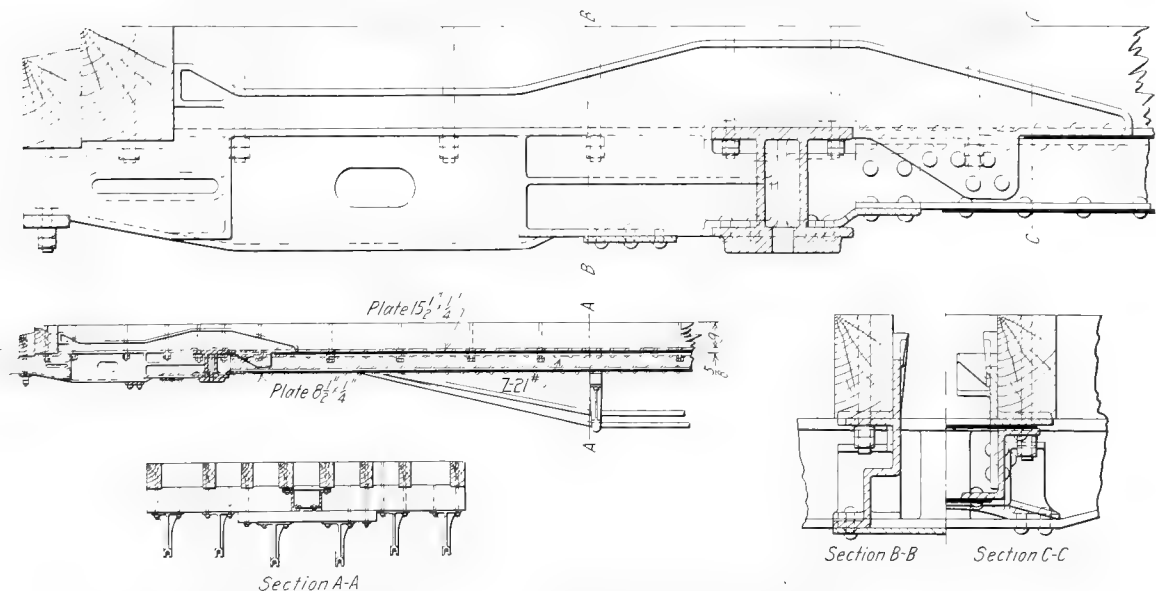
General Application of Universal Reinforcing Draft Arms with Continuous Steel Girder Connection. Universal Draft Gear Attachments Company.
